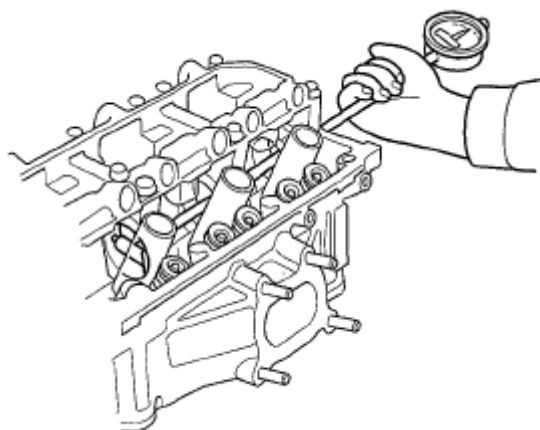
Identifying Inside Diameter Of Camshaft Bearing Surface
